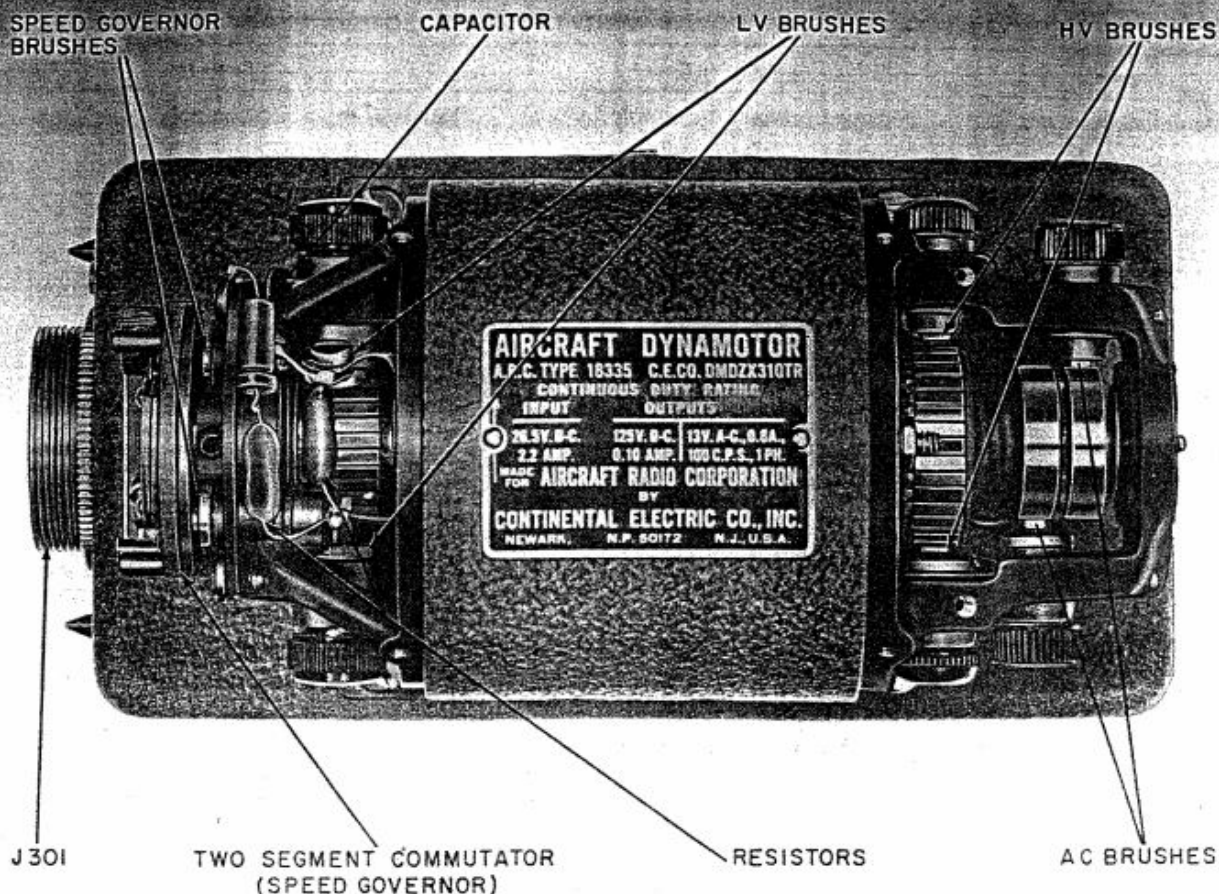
ARC Type P-14A Power Unit, Top View, End Covers Removed
